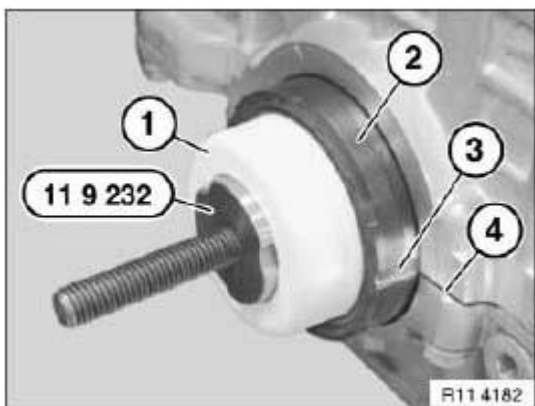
Identifying Support Bushing, Crankshaft Radial Seal With Special Tool 11 9 232
